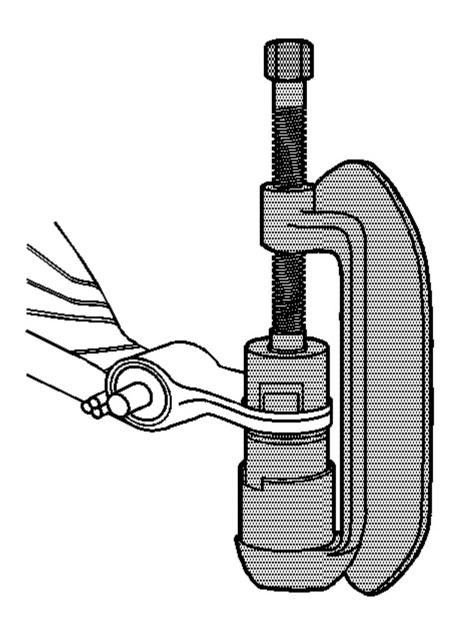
Installing Lower Ball Joint Courtesy of GENERAL MOTORS CORP.
